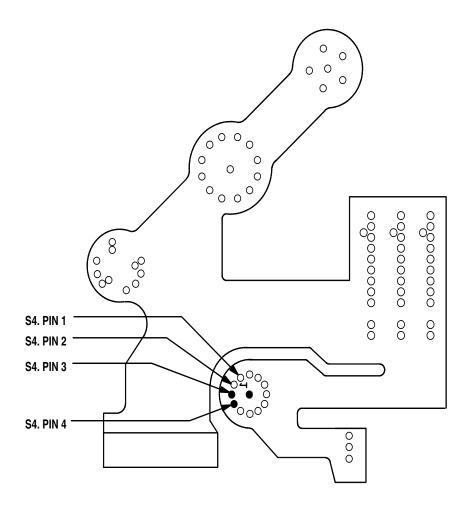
Rear View of Bad Switch Flex Assembly (1A17A1W2)
